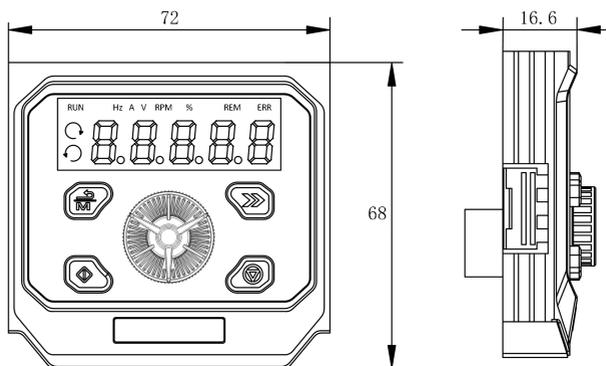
MV820-DP01 appearance and mounting dimensions (unit: mm)
